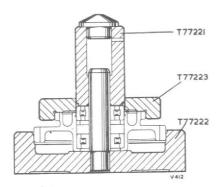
Pressing the outer spacer and upper roller bearing into the idler gear
